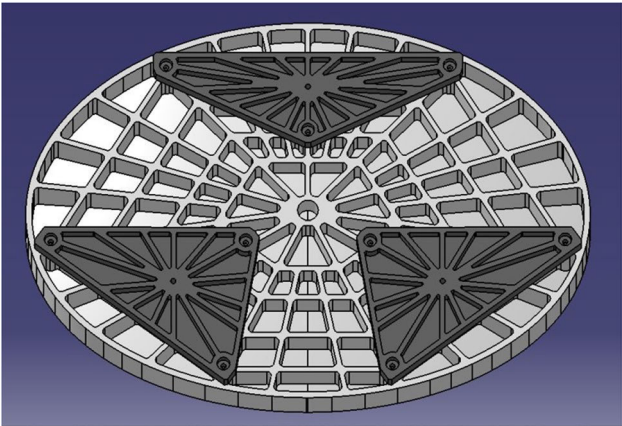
Primary mirror rear side with the foreseen mounting scheme
